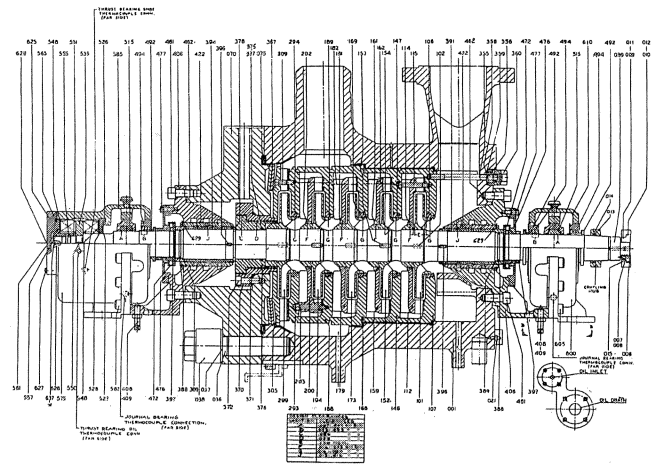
Cross Section View of the Boiler Feedpump (5BD x D520).
